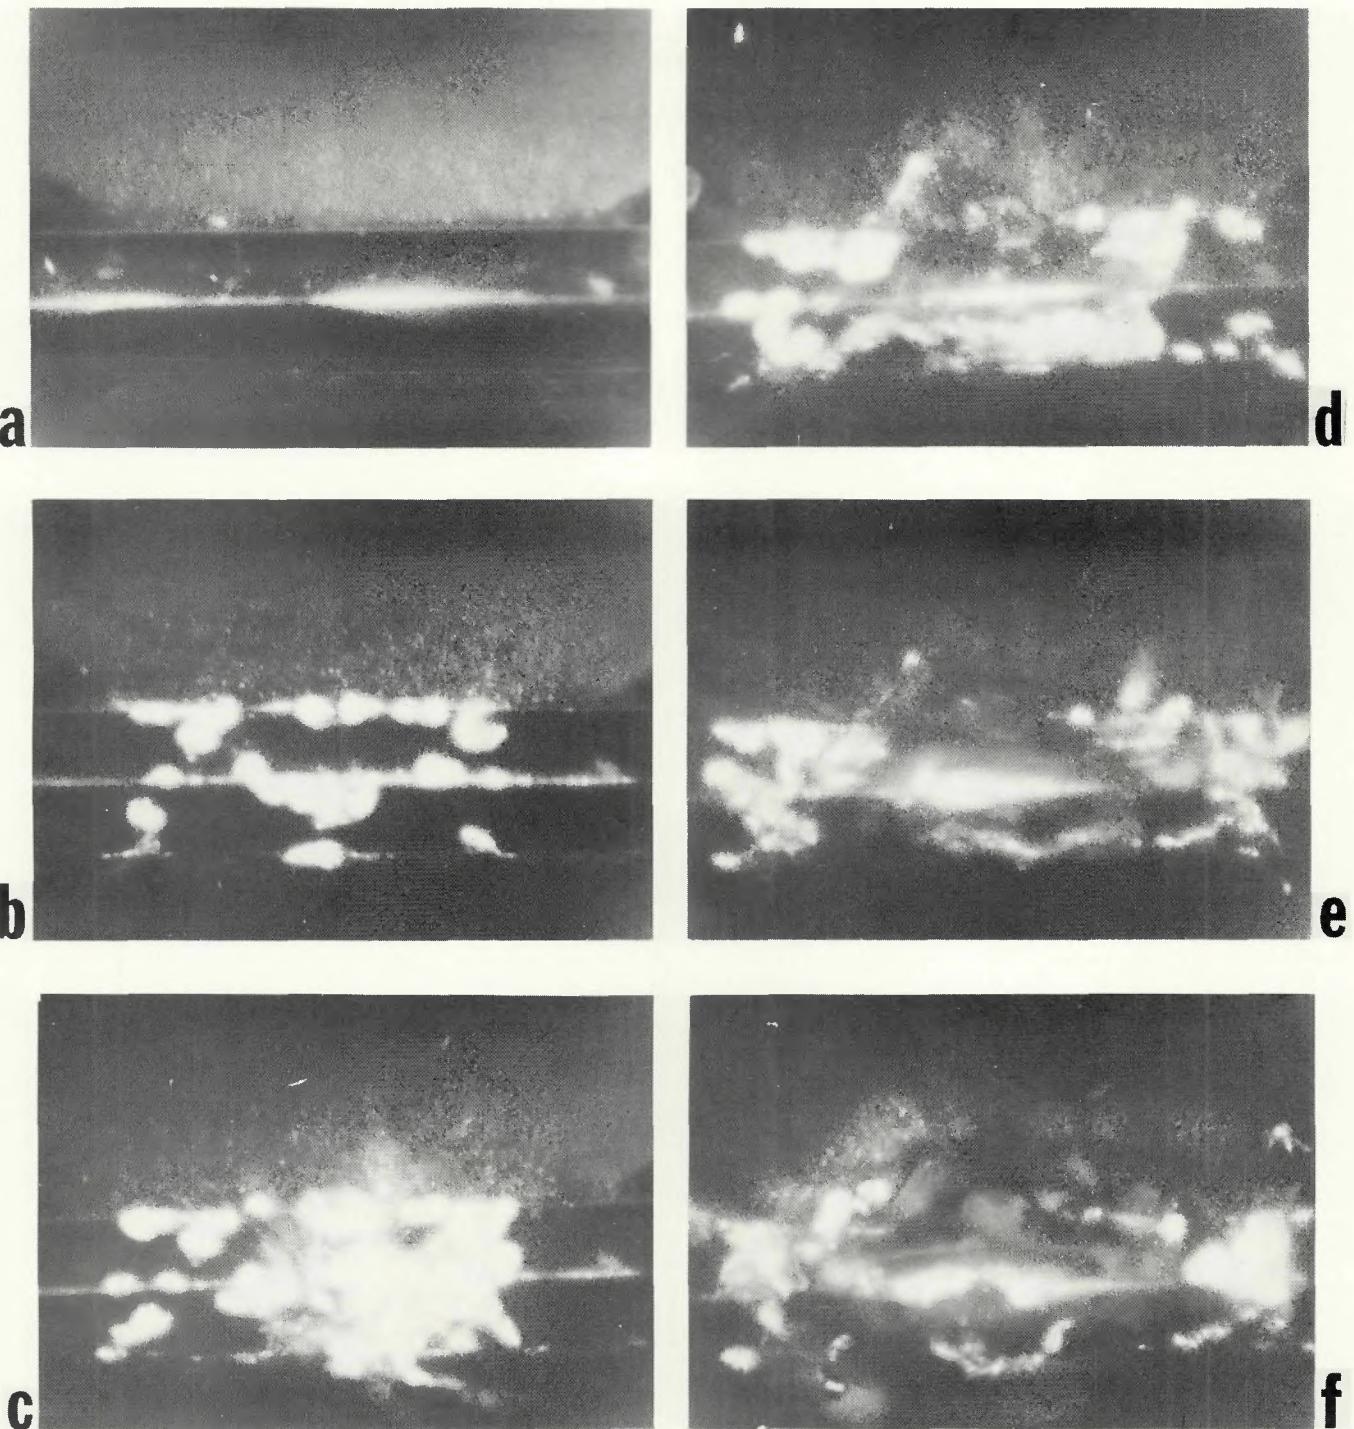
Sequence of welding process for new electrodes: (a) Zinc coating begins to melt, (b) completely molten coating, (c) coating displaced from weld zone, (d) weld nugget begins to form, (e) small plastic nugget, (f) completely plastic nugget
